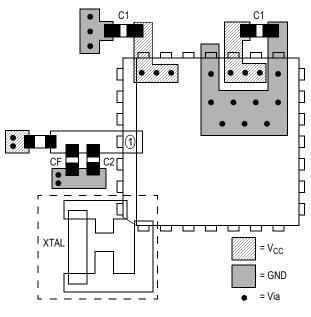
PCB Board Layout Recommendation for the PLCC28 Package
